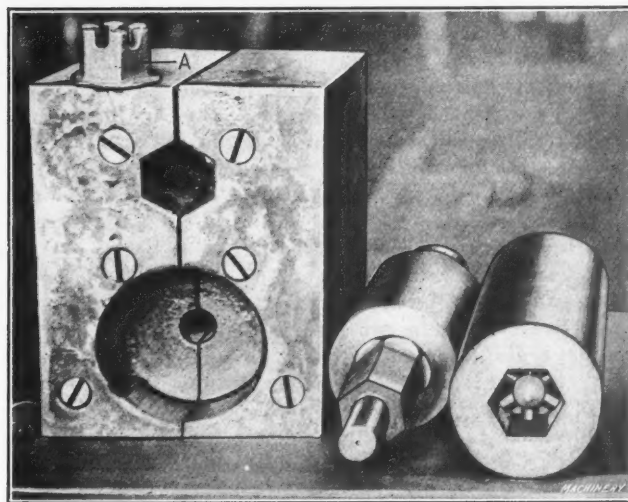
Dies and Tools used in making a Castellated Nut in an Ajax Forging Machine in the L. S. & M. S. Railway Shops at Collinwood, Ohio
